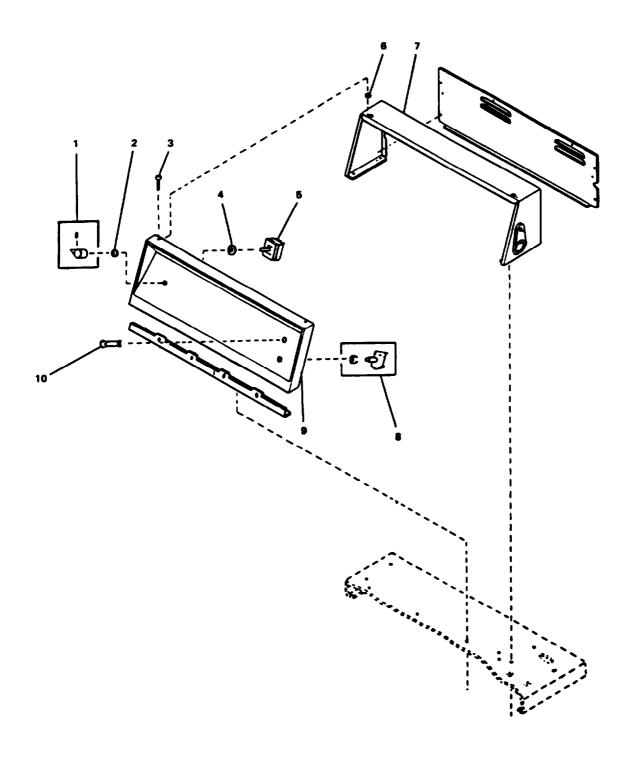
Dryer Cabinet, Exhaust Duct and Base Group (Sheet 1 of 3).
